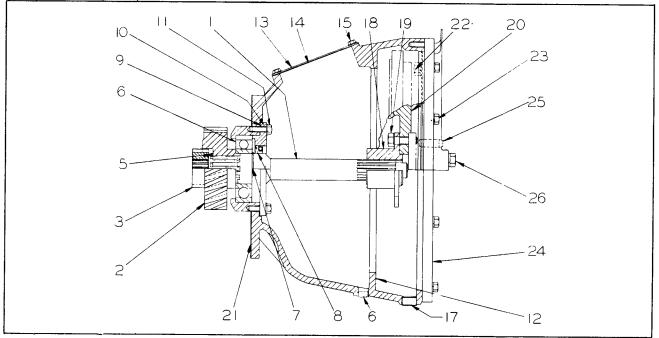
MECHANICAL DRIVE ASSEMBLY
